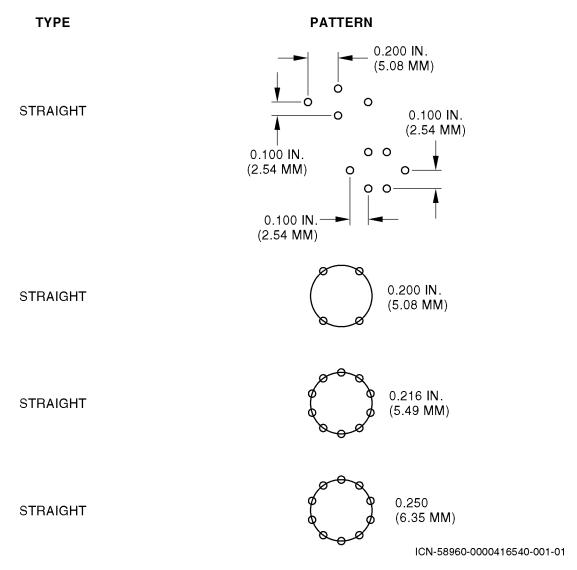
(Sheet 8 of 8) Lead Patterns and Dimensions
